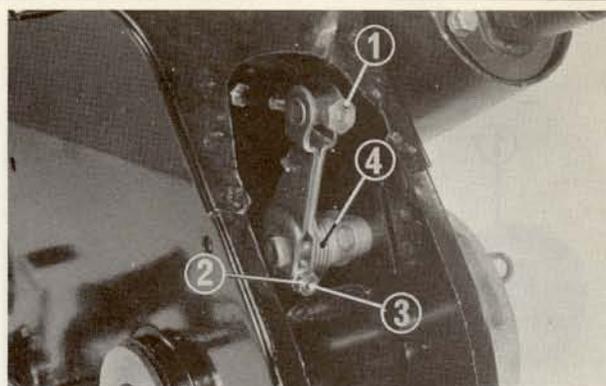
(1) Adjusting nut (2) Lock nut (3) Bolt (4) Return spring
